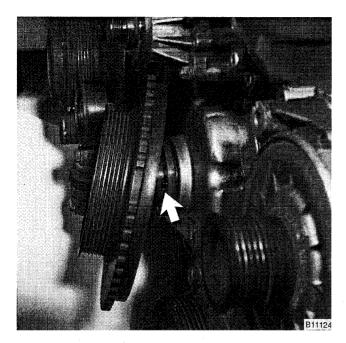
Vibration damper with drive belt pulley being removed. Note hub locating dowel (arrow).
